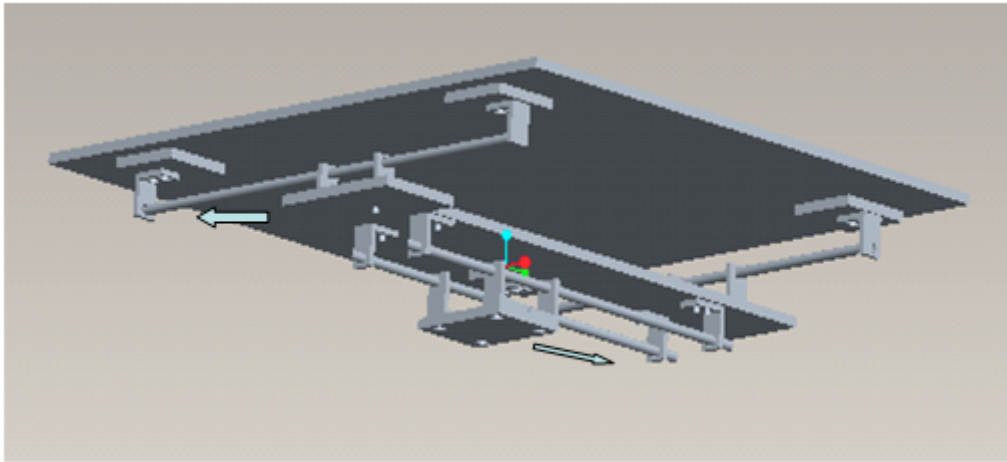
CAD Drawing of Extrusion Vehicle Final Design
